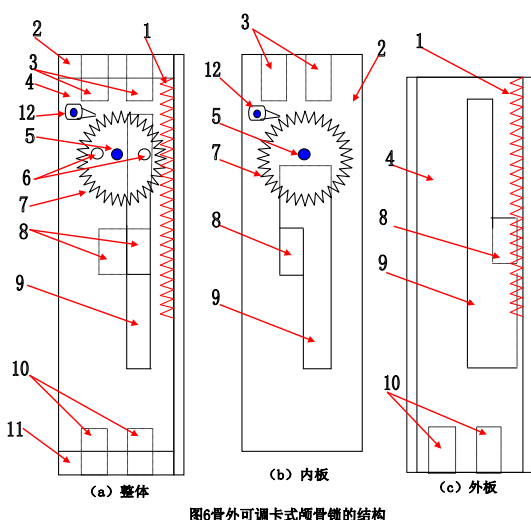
Structure of extracorporeal adjustable clamp cranial lock
